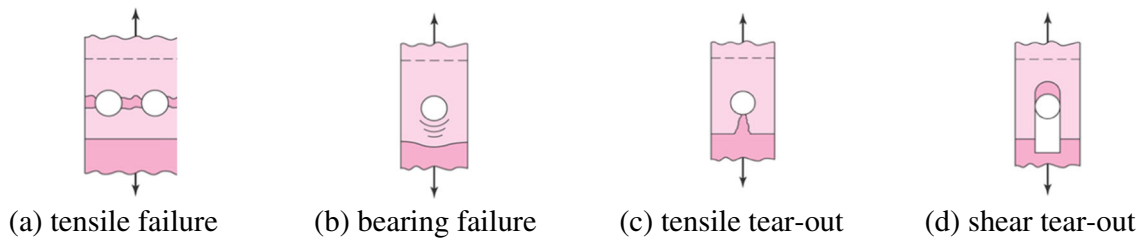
Failure modes of bolted fasteners [11]. t Tensile failure. b Bearing failure. c Tensile tear-out. d Shear tear-out
